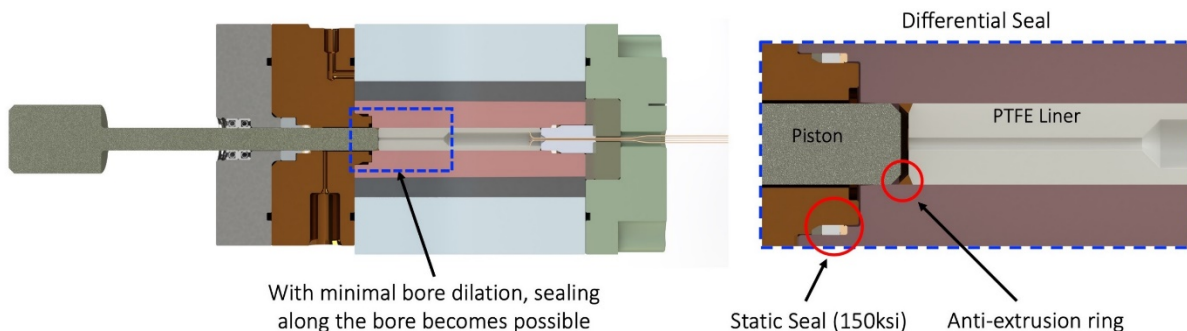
With the bore under compression, the seal is directly along the bore of the vessel with an anti-extrusion ring and PTFE liner.
